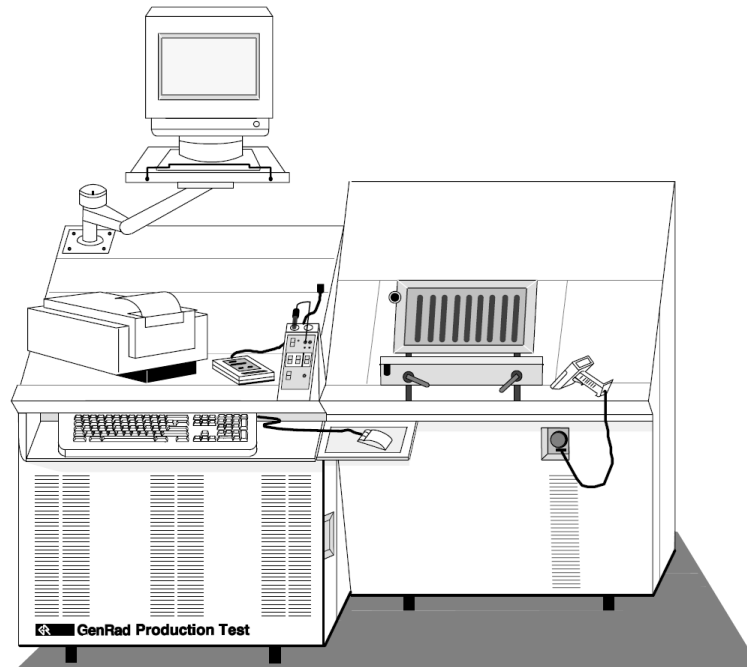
Used testing machine GenRad™ GR2281 [5]
